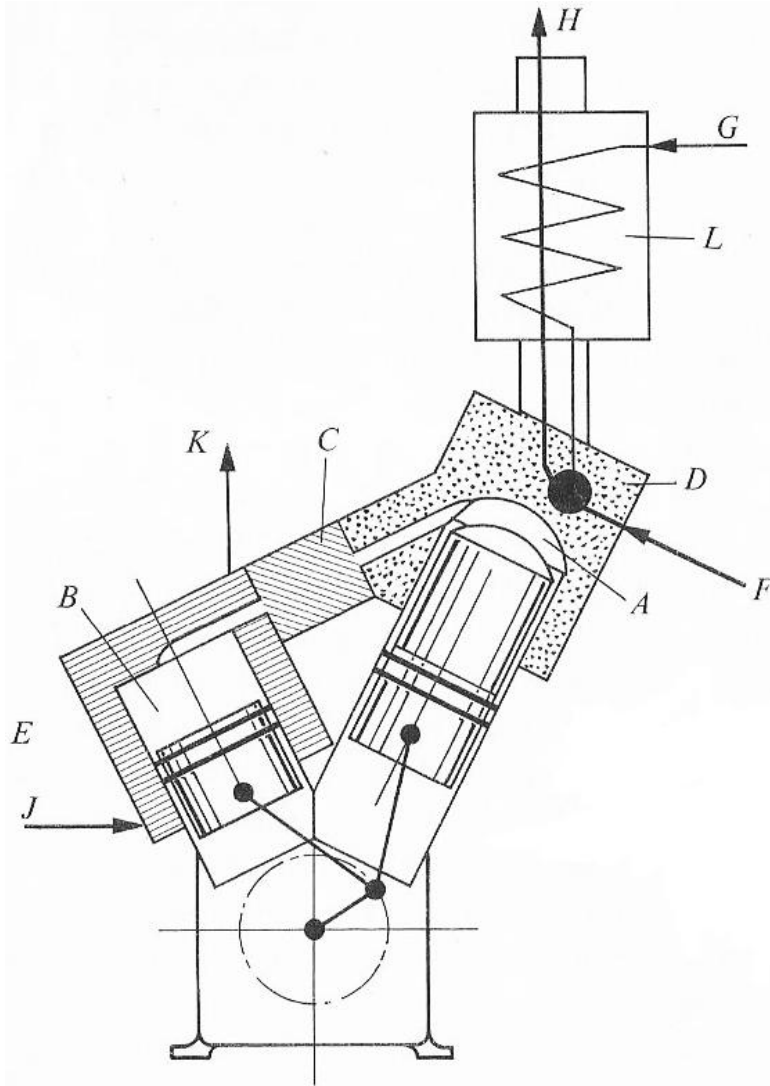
Stirling engine diagram. A - Space for expansion, B - Space for compression, C - regenerator, D - heater, E - cooler, F - fuel inlet, G - air inlet, H - exhaust products of combustion, J - water inlet, K - water outlet, L - exhaust-gas inlet-air preheater [17].
